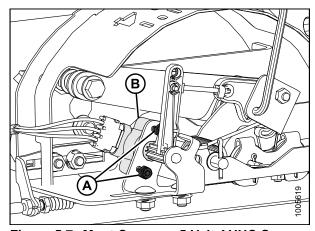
Most Common 5 Volt AHHC Sensor Assembly
